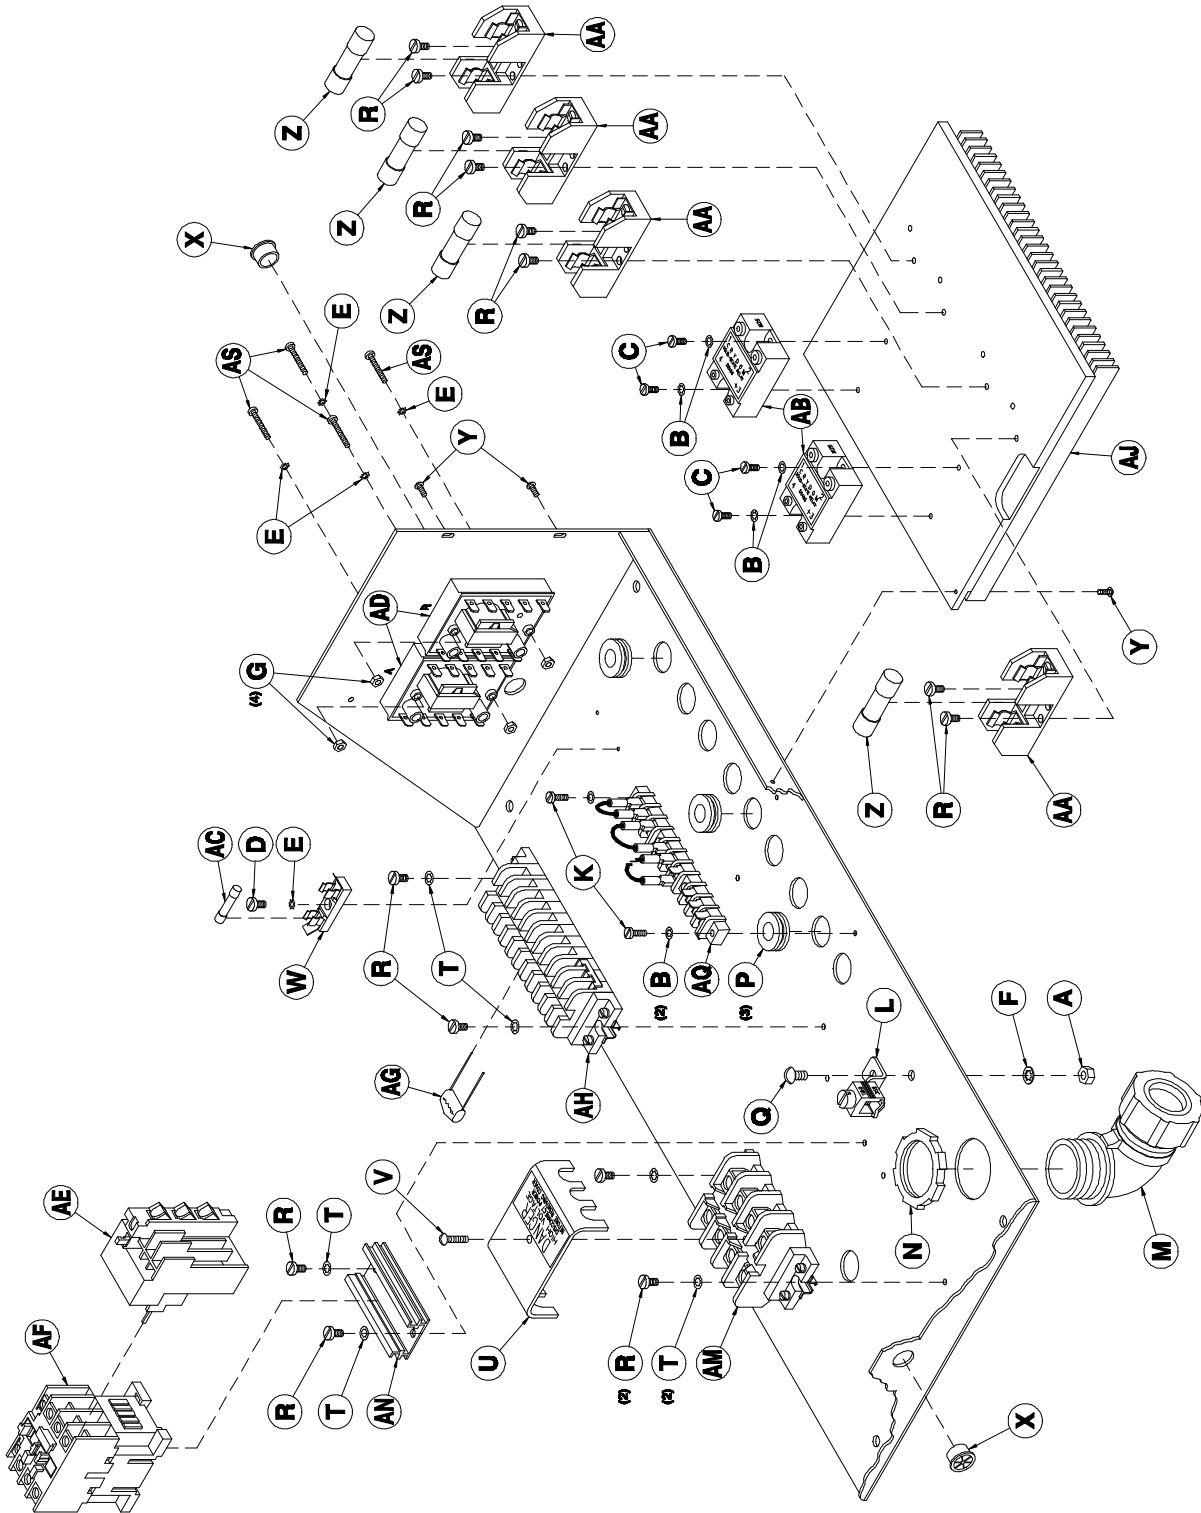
Electric Console (IHTC) (Part No. IP15650-SIZE-DT) Exploded View Sheet 1 of 2
